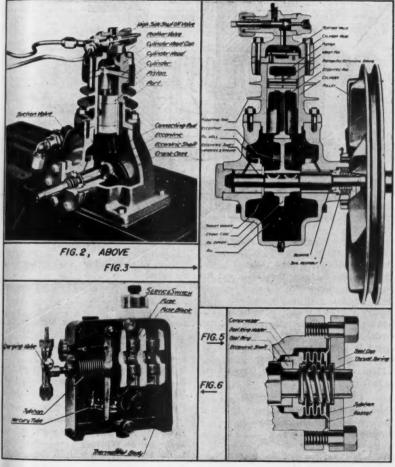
SECTIONAL VIEW OF ZEROZONE COMPRESSOR. FIG. 3. CROSS SECTION OF S.C. COMPRESSOR. FIG. 5. ZEROZONE SHAFT SEAL. FIG. 6. THERMOSTATIC CONTROL
